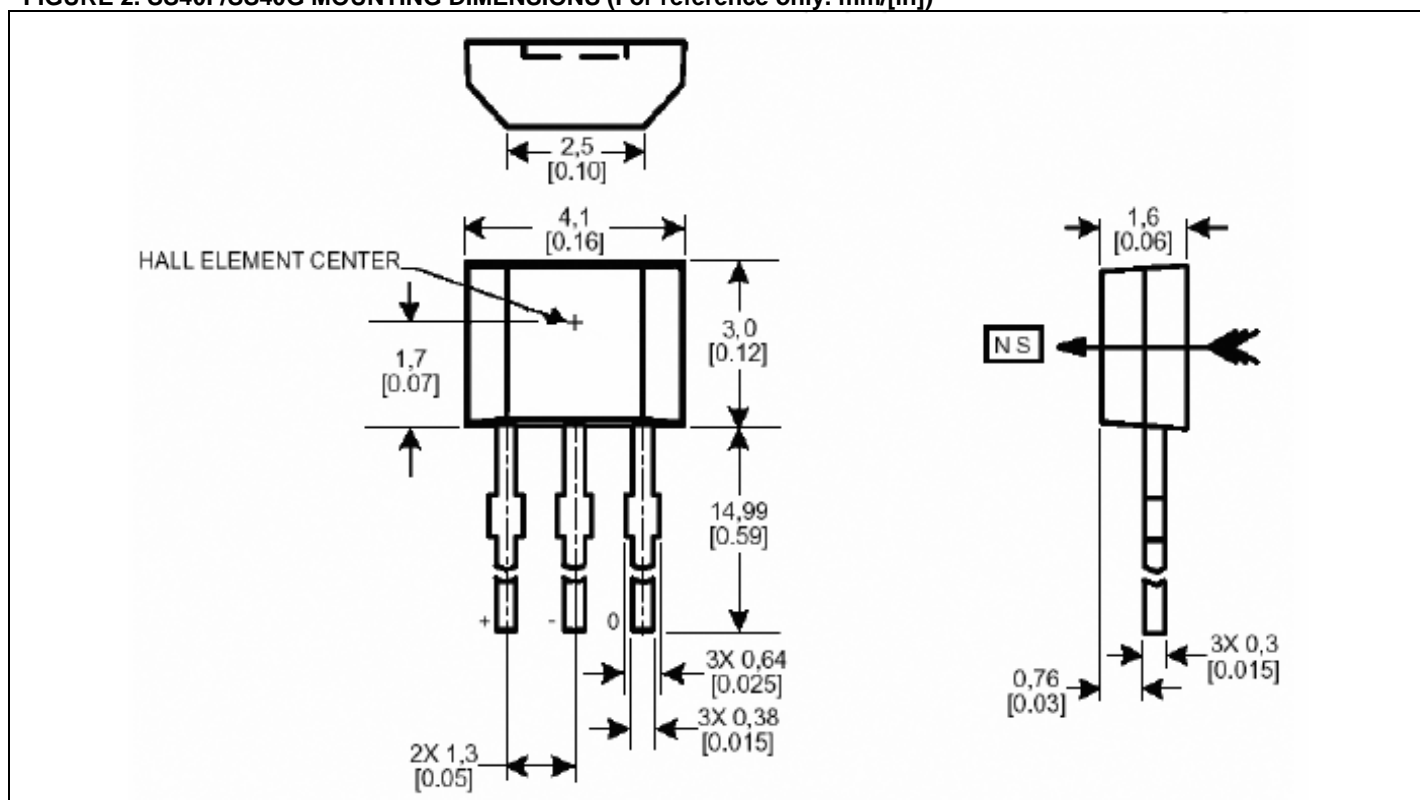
SS40F/SS40G MOUNTING DIMENSIONS (For reference only. mm/[in])
